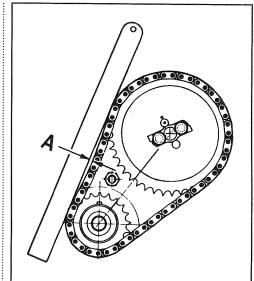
checking timing chain wear Dimension 'A' should not exceed 0.4" (10mm)
